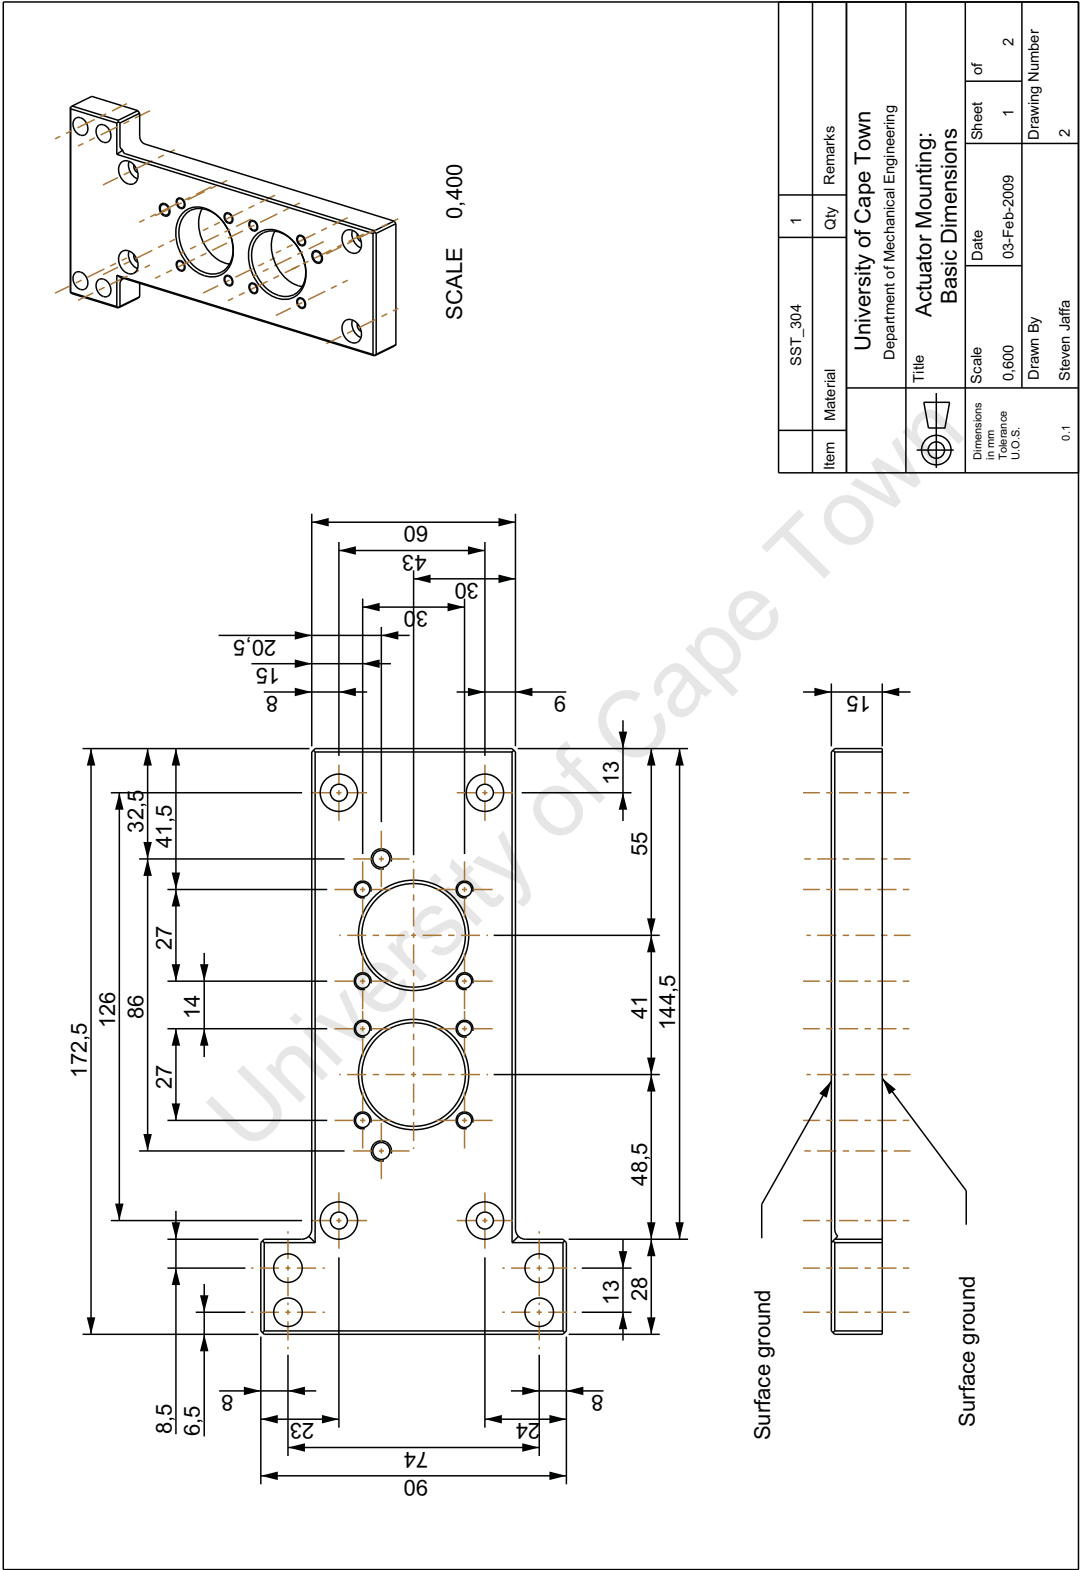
Manufacturing Drawing: Actuator Mounting Drawing 1 – Basic Dimensions.
